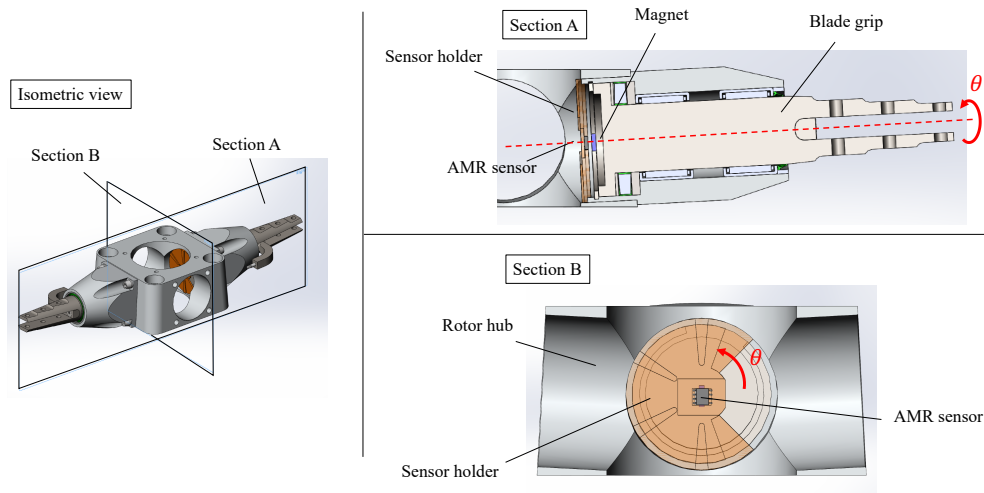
A schematic of the AMR sensor installation on the blade grip assembly
